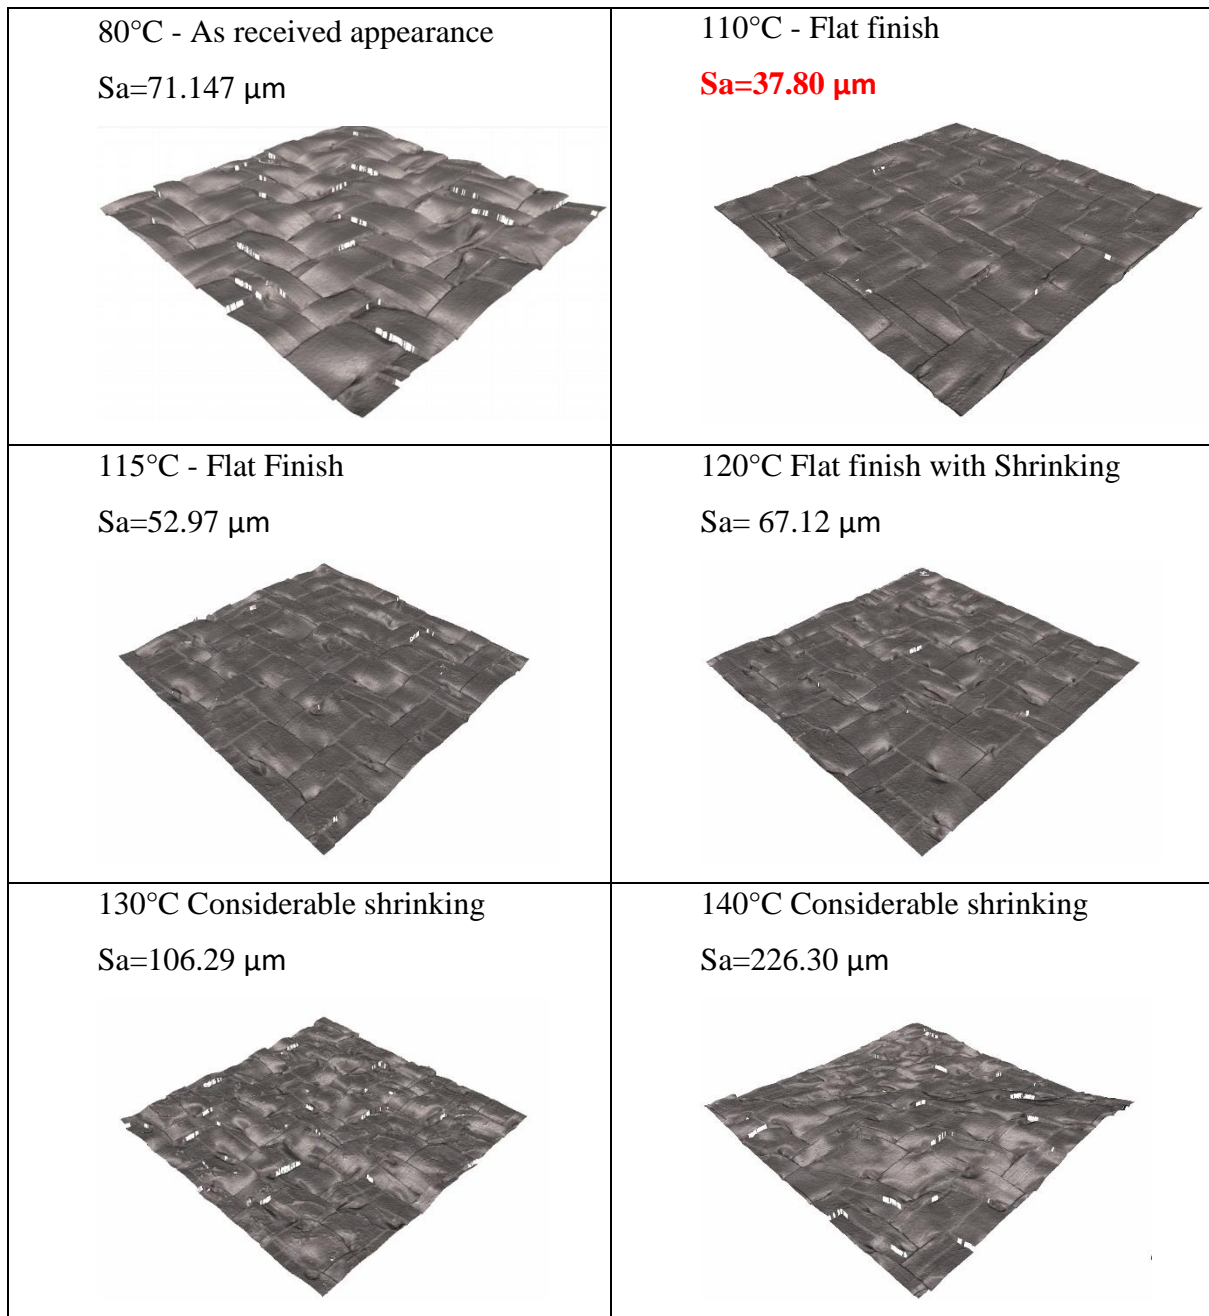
Three-dimensional surface finish of the layer in contact with the hot mould at different mould temperatures
